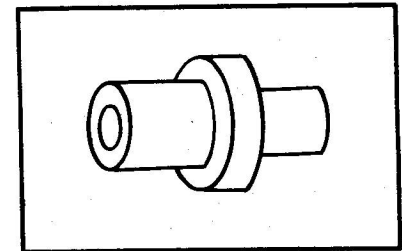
Anvil (G-4900) for Servicing Card Assembly
